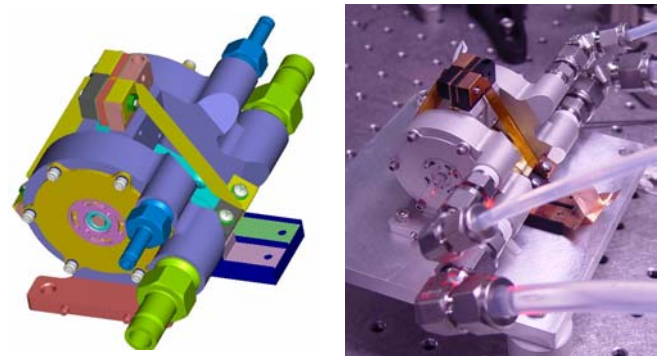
Drawing and photograph of the diode-pumped laser oscillator head
